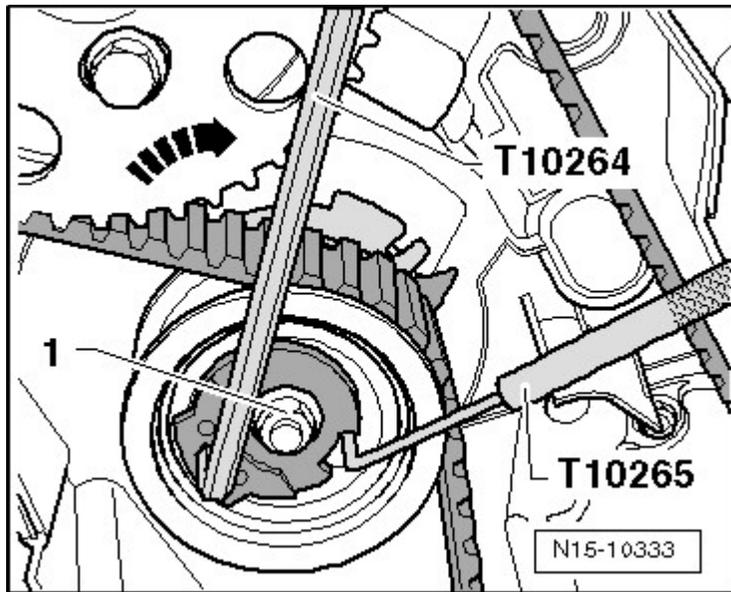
Identifying Long Reach T10264 And Locking Tool T10265
